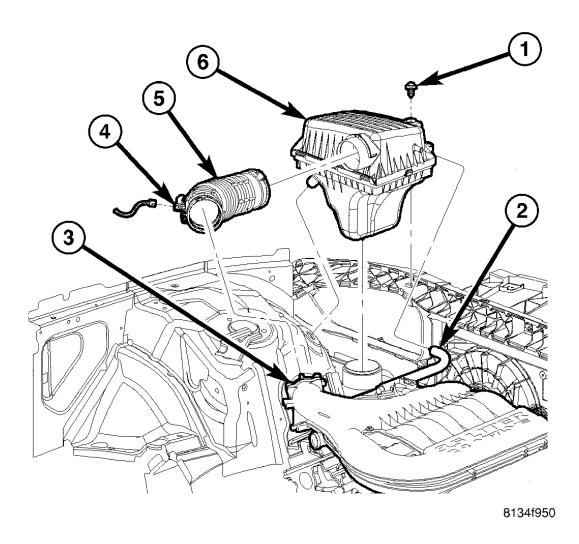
Air Cleaner Housing Assembly Courtesy of CHRYSLER LLC
